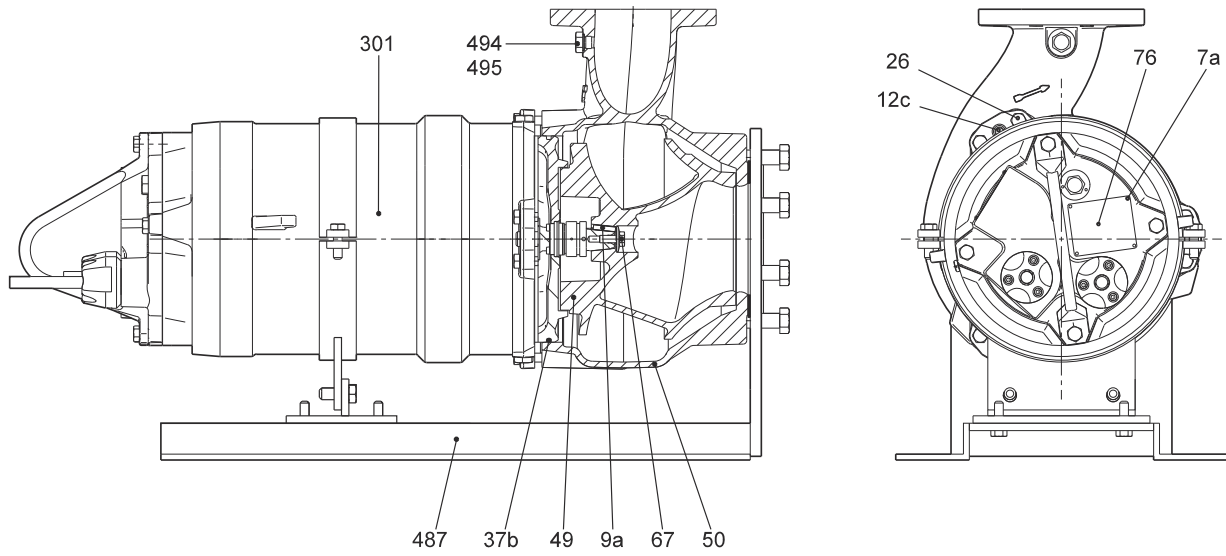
Installation type H, dry, horizontal pump on base stand - S-tube impeller
